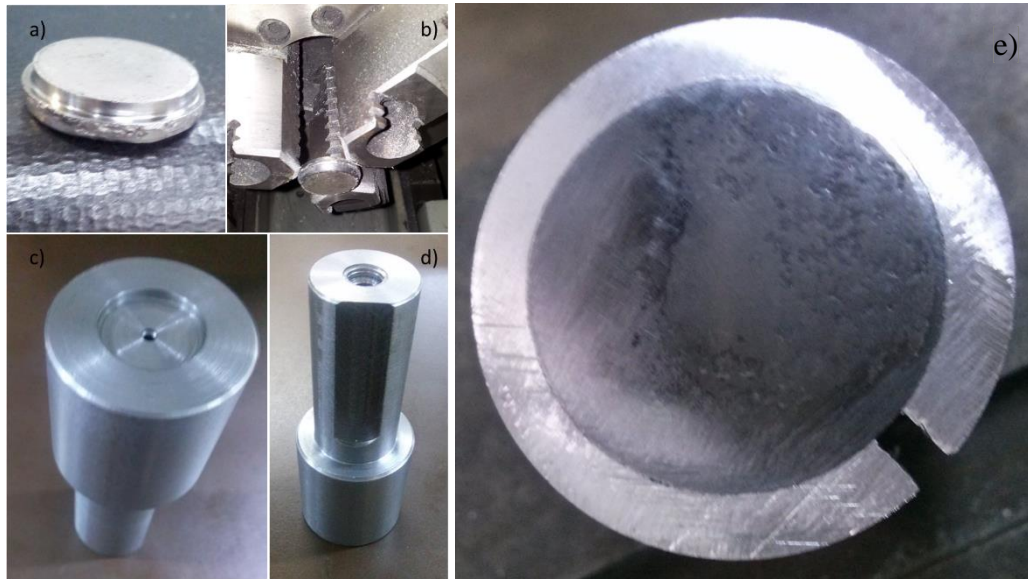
a) Tool shape b) machining (c-d) tool holder e) 5vol% HfC
